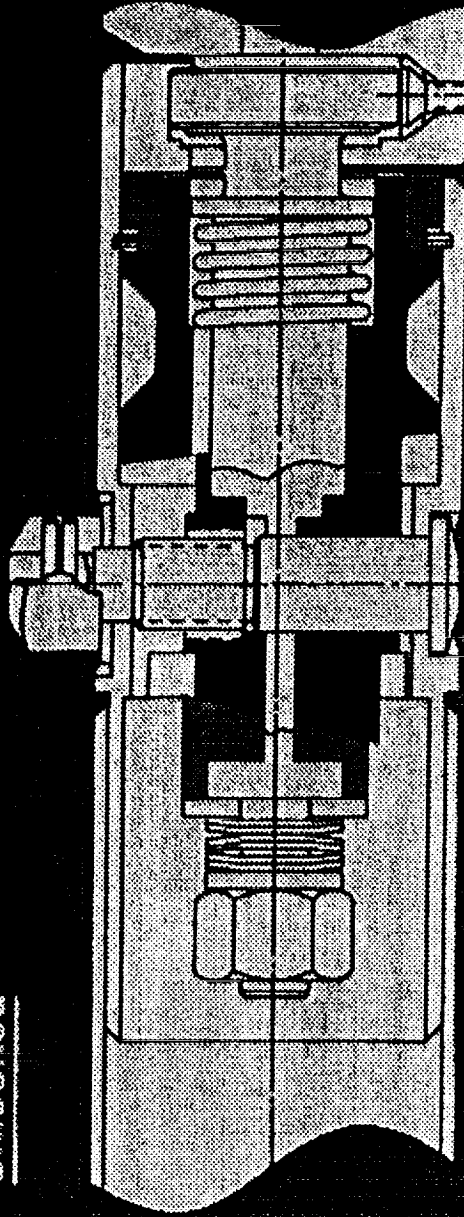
Illustration of one truss joint and connection node of the tetrahedral truss with panels concept.
